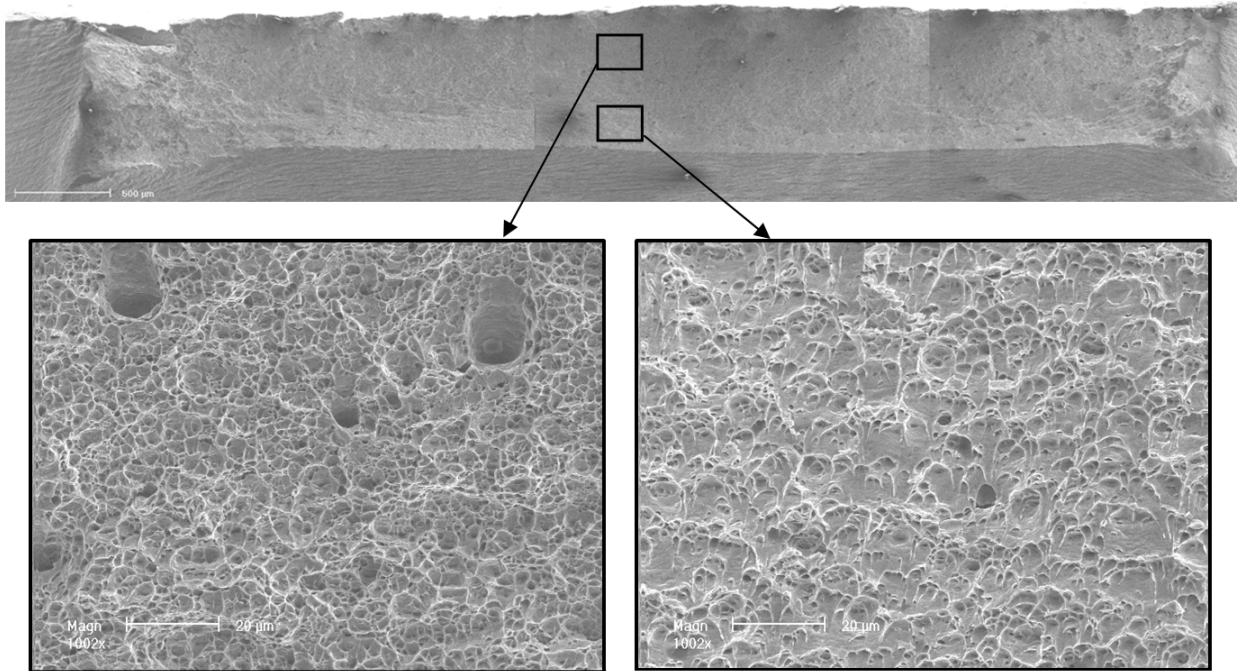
A scanning electron micrograph and close-up views of the failure surface from a specimen machined from a wide specimen with a weld length of 30 mm.
